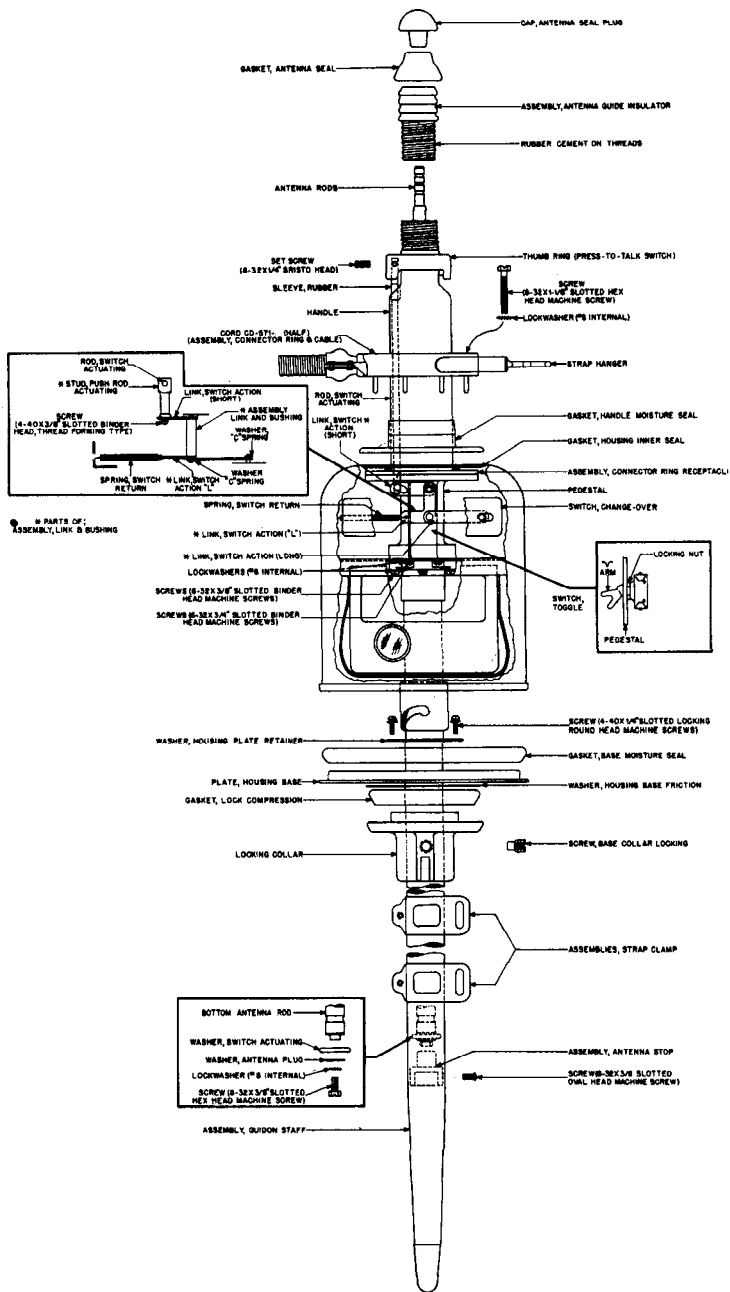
Radio Receiver and Transmitter BC-745-(\*), Assembly Instruction Detail
